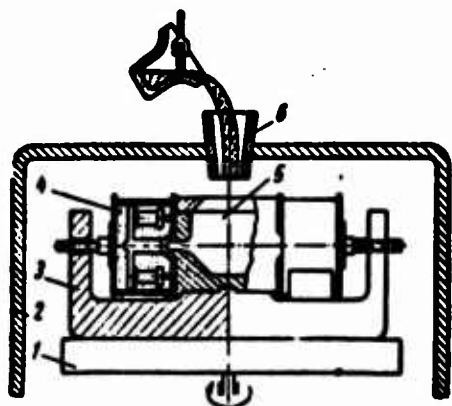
Diagram of centrifugal casting with vertical axis of rotation; 1 - face plate; 2 - shell; 3 - cross-piece; 4 - mold; 5 - hearth; 6 - funnel.
